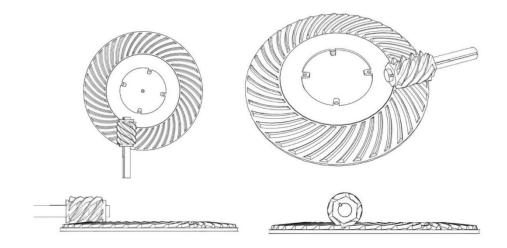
Shaft drive with a hypoid gear arrangement^[58]
